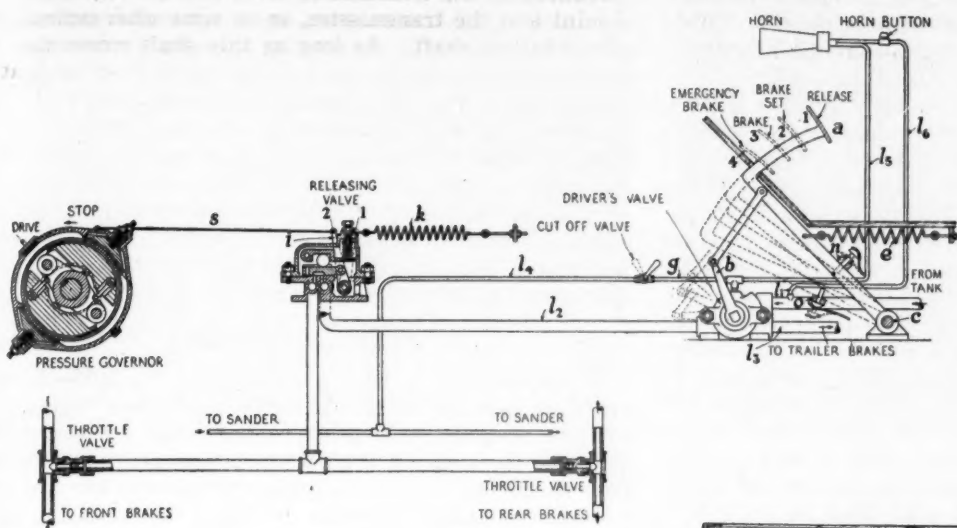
Brake operation for motor vehicles with driver's valve and release valve
